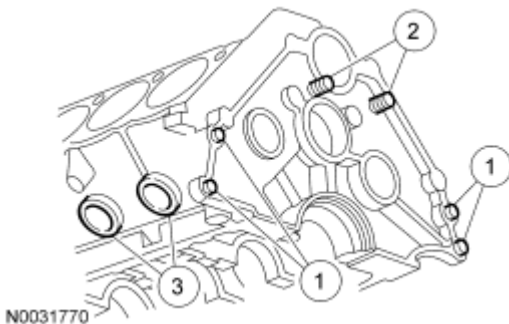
Identifying Cylinder Block Dowels, Oil Gallery Plugs & Coolant Jacket Plugs
